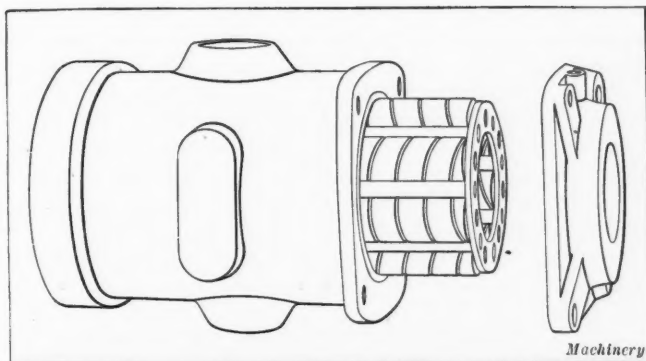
Roller Bearing Box which is Interchangeable with Plain Box in Universal Type of Shaft Hanger
